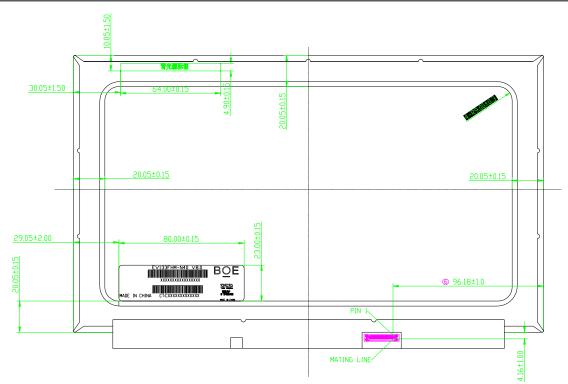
TFT-LCD Module Outline Dimensions (Rear view)
